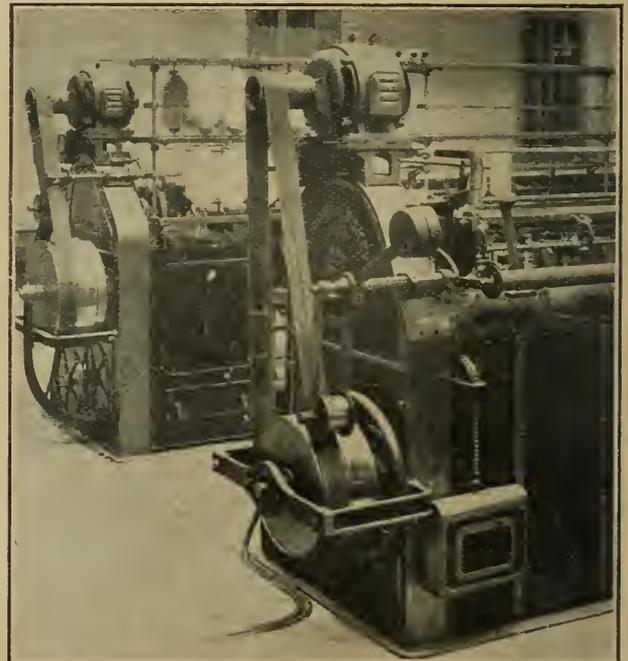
BELT DRIVE OF SPINNING FRAME, WITH MOVABLE JOCKEY PULLEY.
